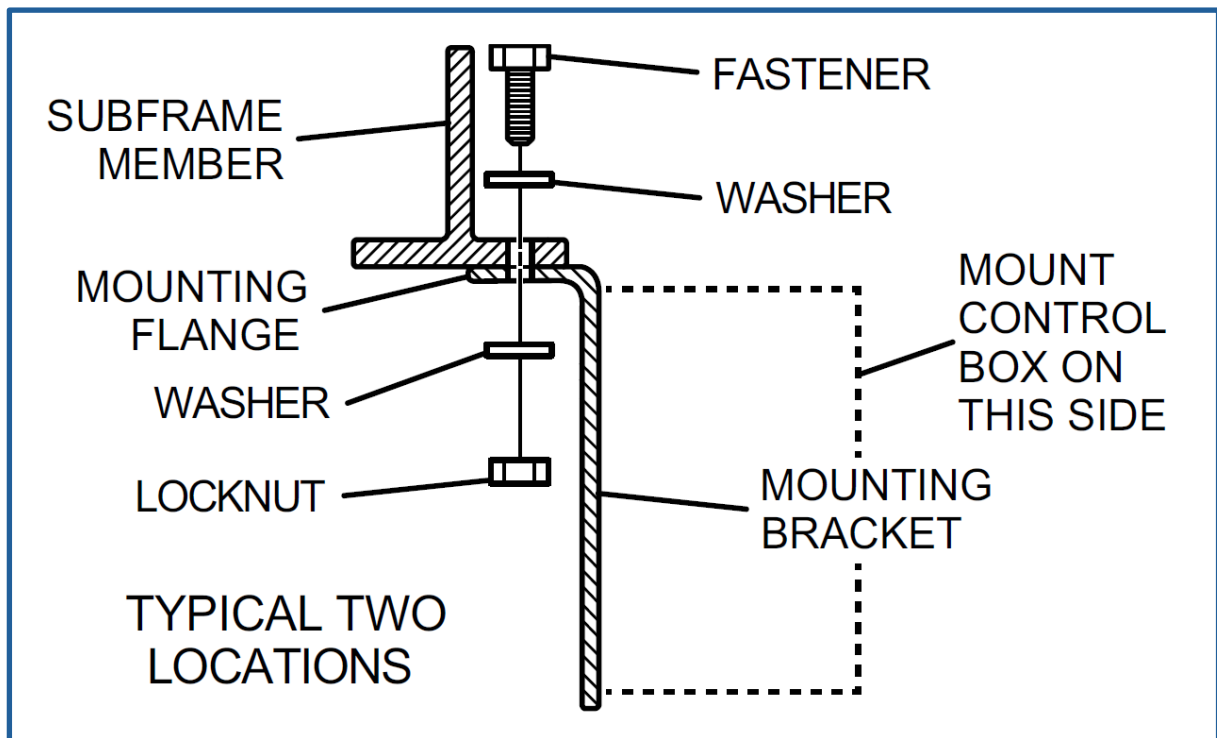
Assembling Mounting Bracket to Chassis Fasteners
